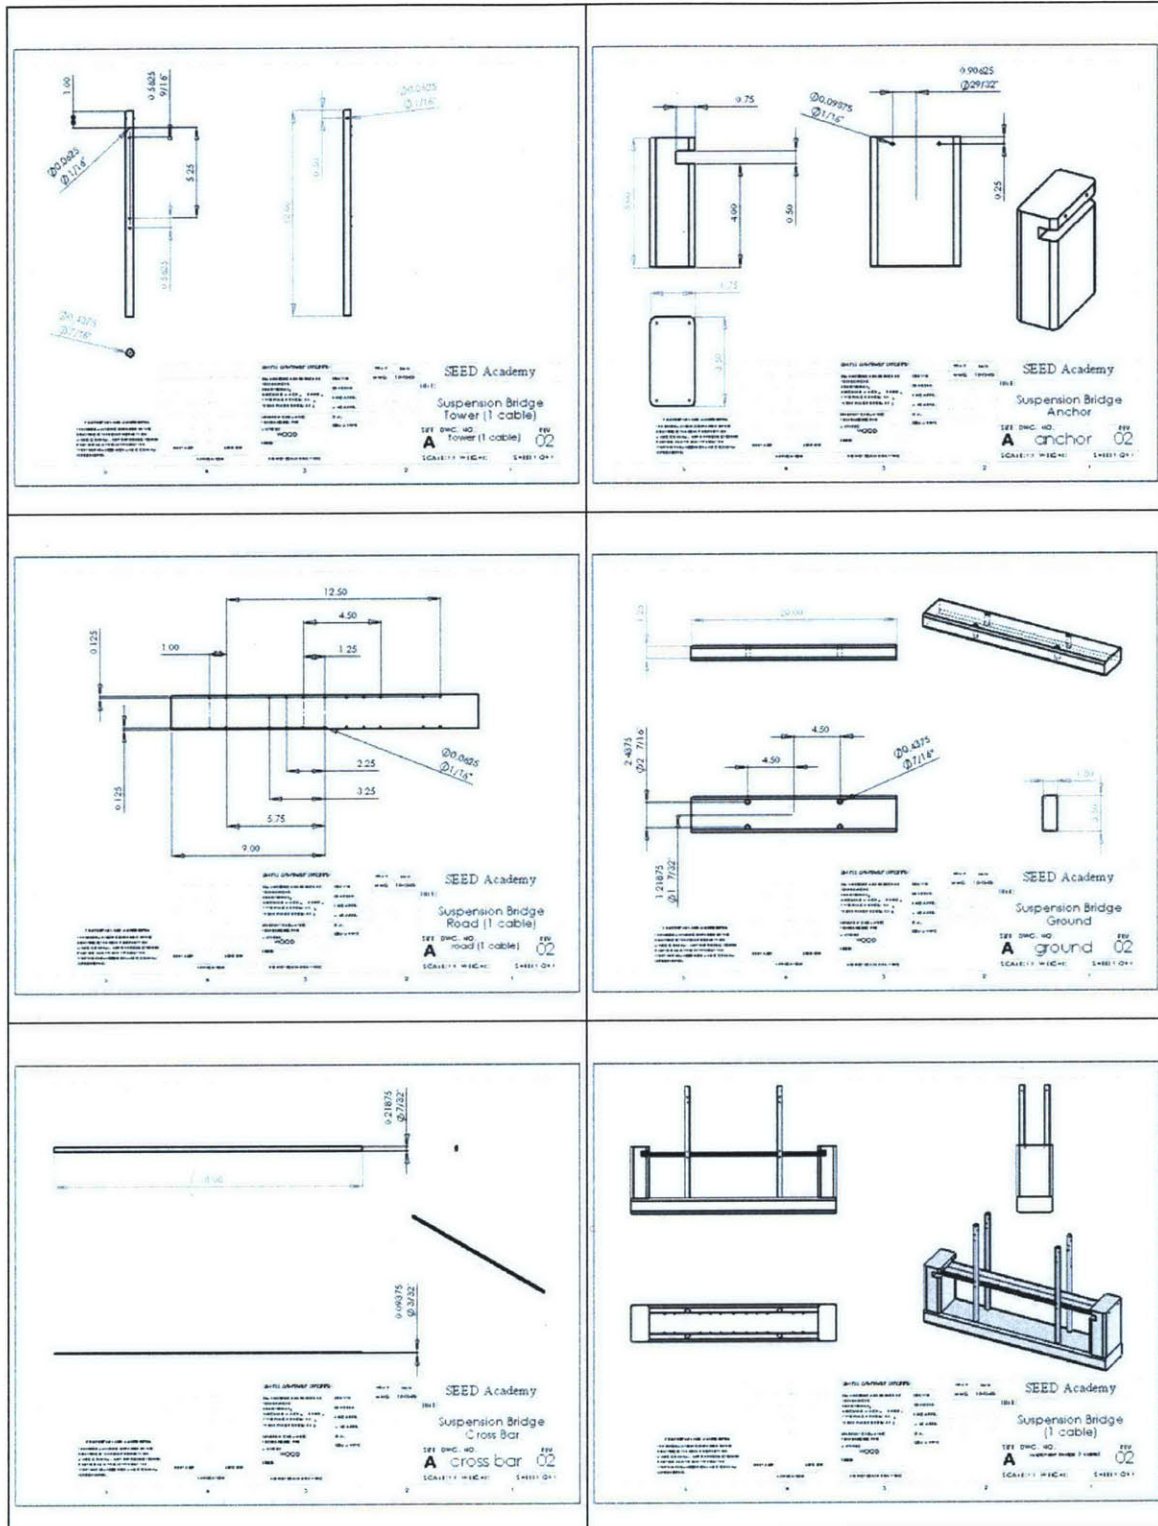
SEED Academy 10th Grade Civil Engineering drawings for suspension bridge
